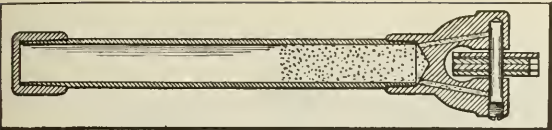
Sectional View of "Brandenburg" Grinding Wheel Dresser, showing Provision for Lubrication
